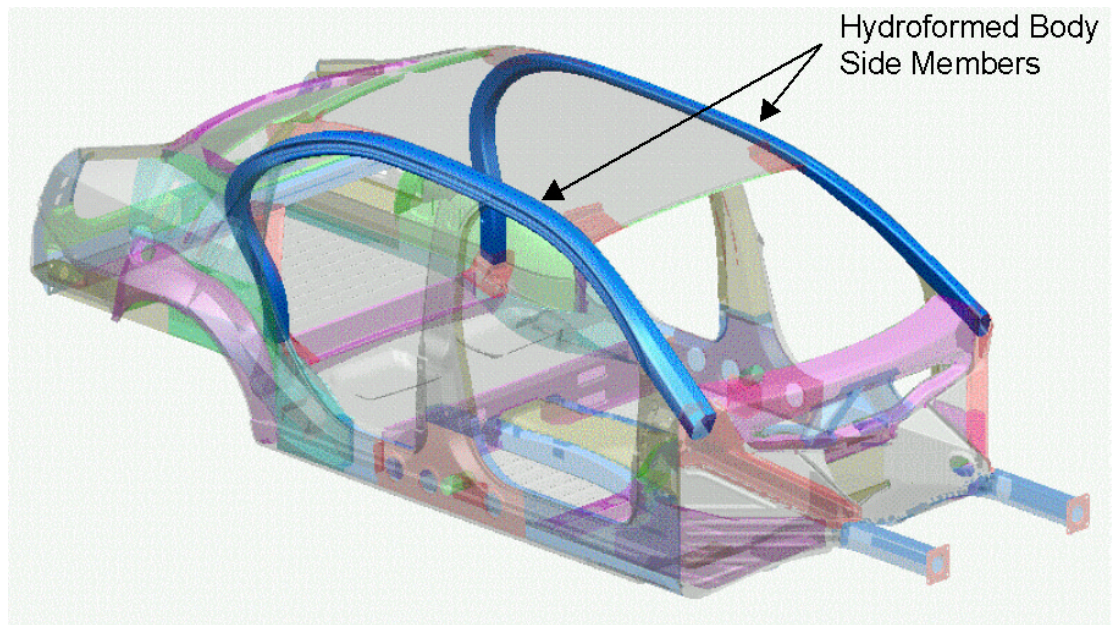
PNGV-Class tubular hydroformed body side members 3/4 front view
